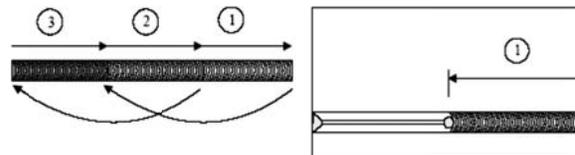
c - Welding sequence for cracks with length less than 300 mm
